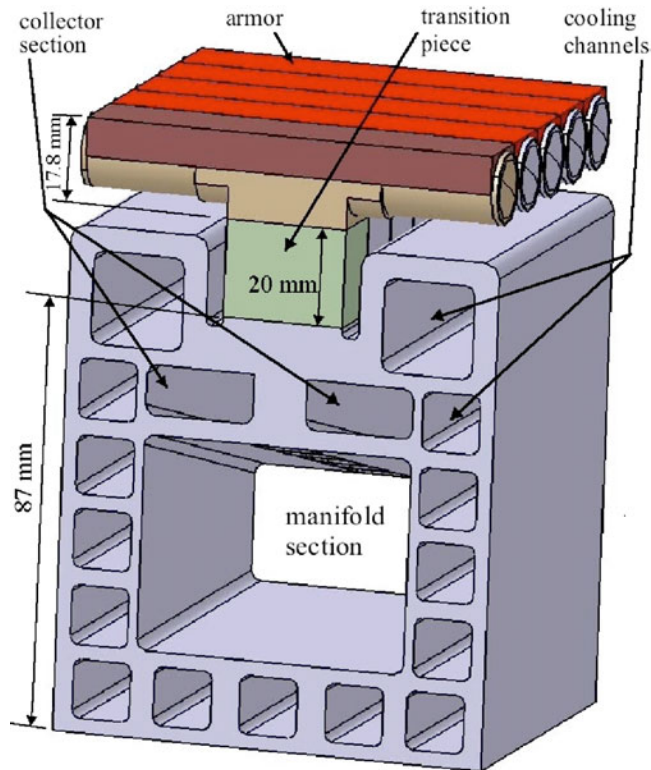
Divertor manifold unit consisting of several T-tubes on a manifold section (the divertor target plate consists of the assembly of several such units).
